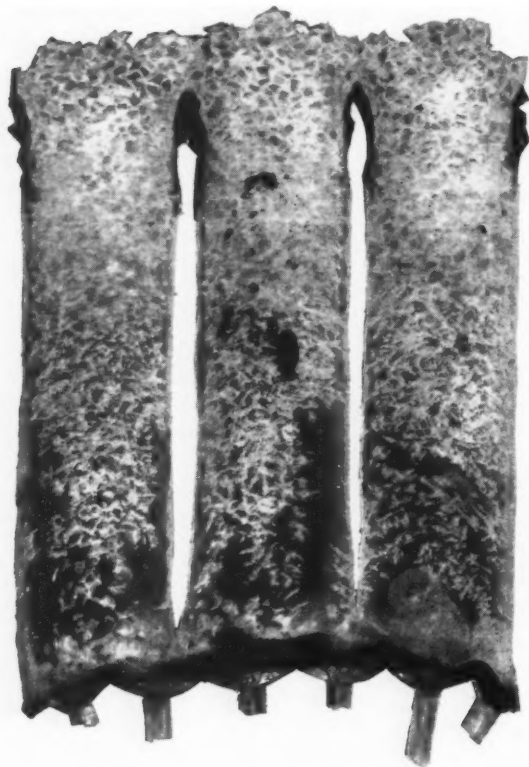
Photograph of Unfilled Vinyl Molding Compound Removed from an Injection Machine Cylinder after Burned. Material Began to Appear in the Mold
